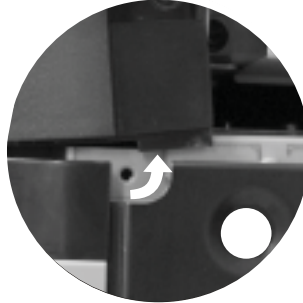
Remove the scanner right cover (M830; 2 of 4)
